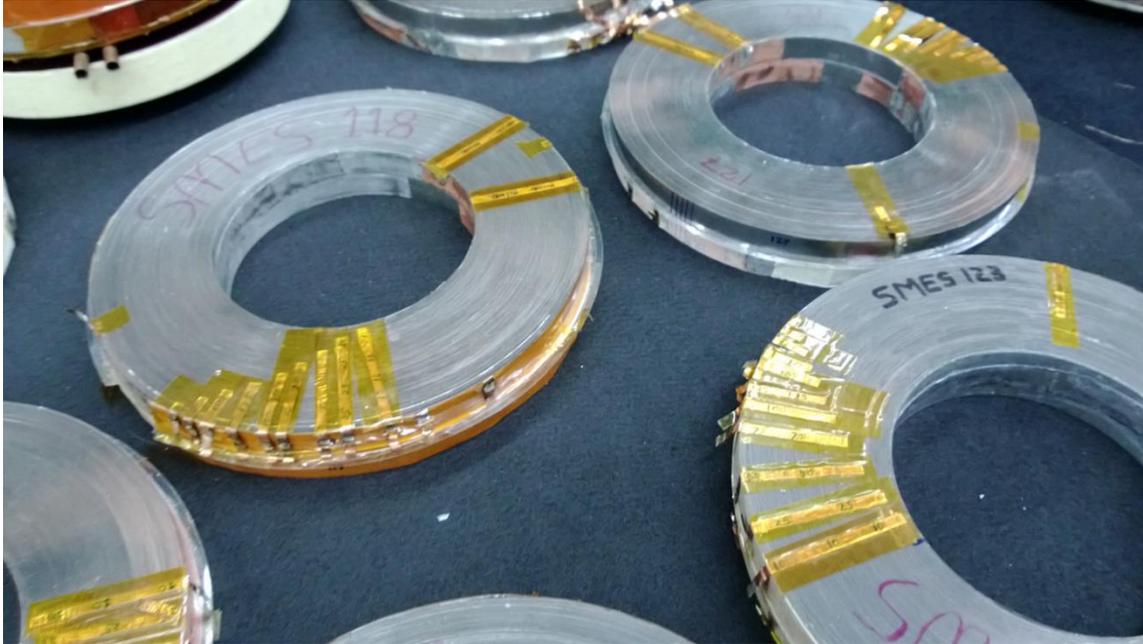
HTS double pancakes with number of voltage taps for QA testing. These v-taps are removed for final assembly.
